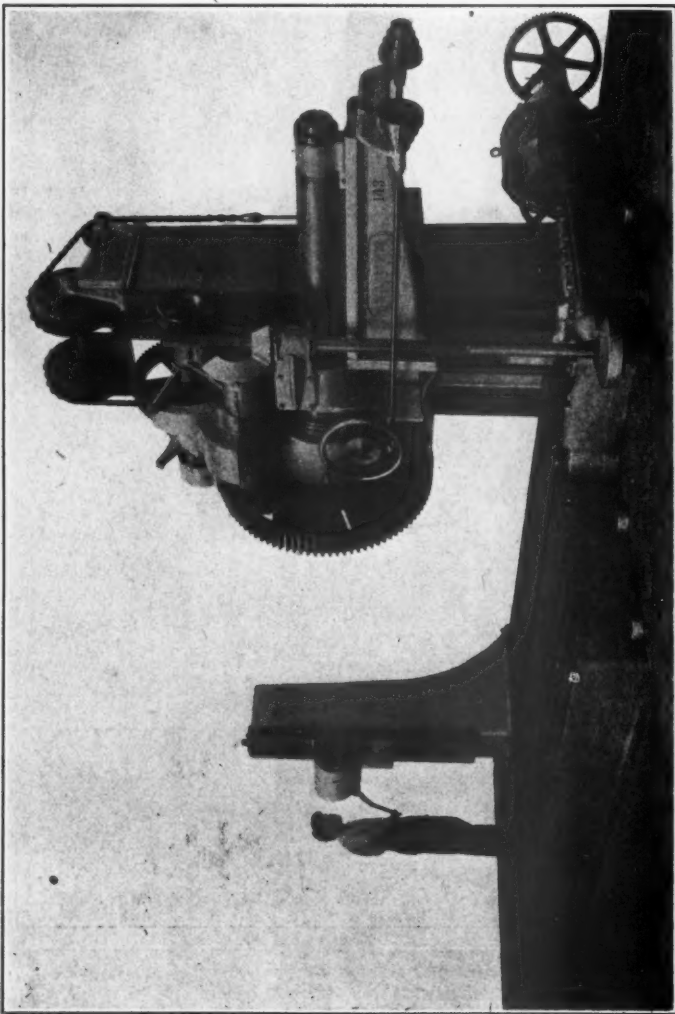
DIRECT DRIVE FOR A LARGE HORIZONTAL BORING, MILLING AND DRILLING MACHINE.—BEAMAN & SMITH.
